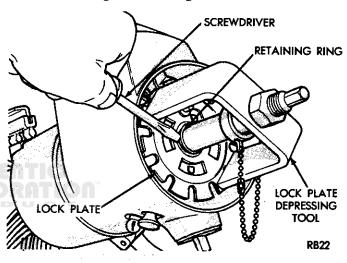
Remove Lock Plate Retaining Ring Using Tool C-4156
